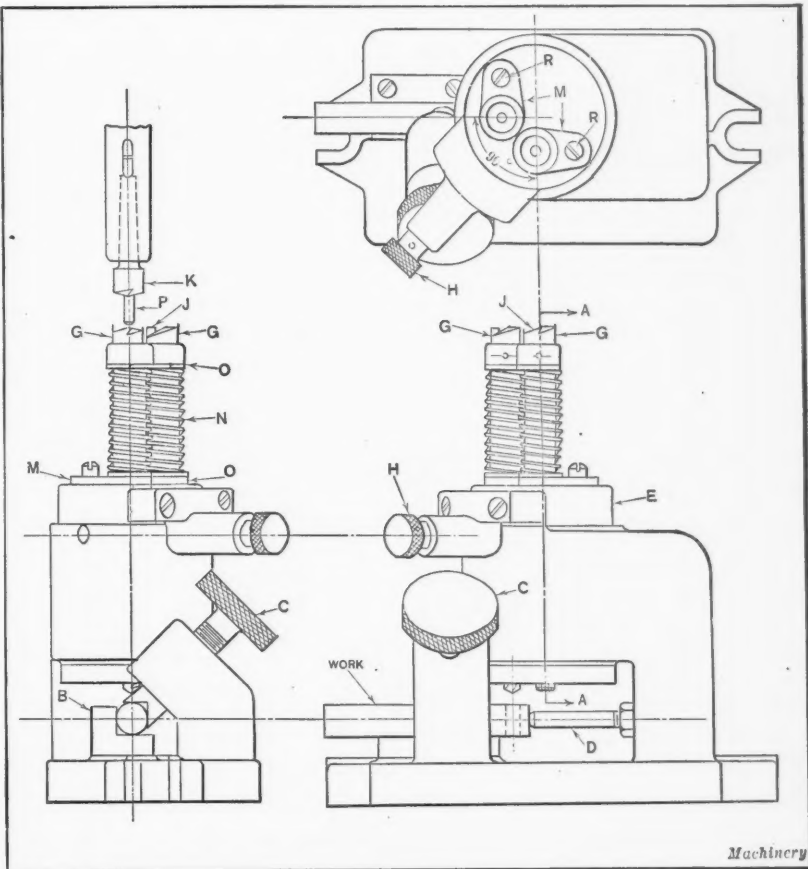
Combination Self-contained Drilling and Reaming Jig
